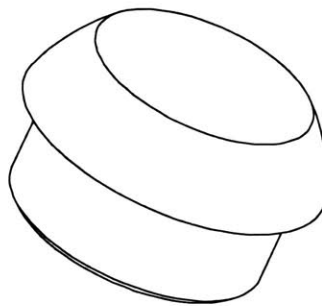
Method For Inexpensive Manufacture of Target Surfaces
